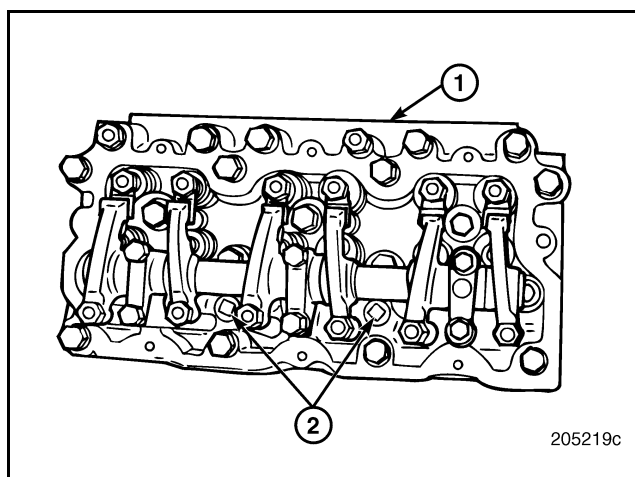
Cylinder Head Pipe Plugs (3/4-Inch NPT)
